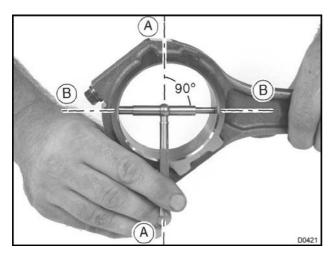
Measuring the connecting rod bearing bore for an out of round condition
